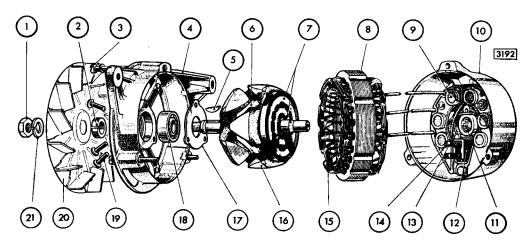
Exploded view of the Lucas 11AC alternator
